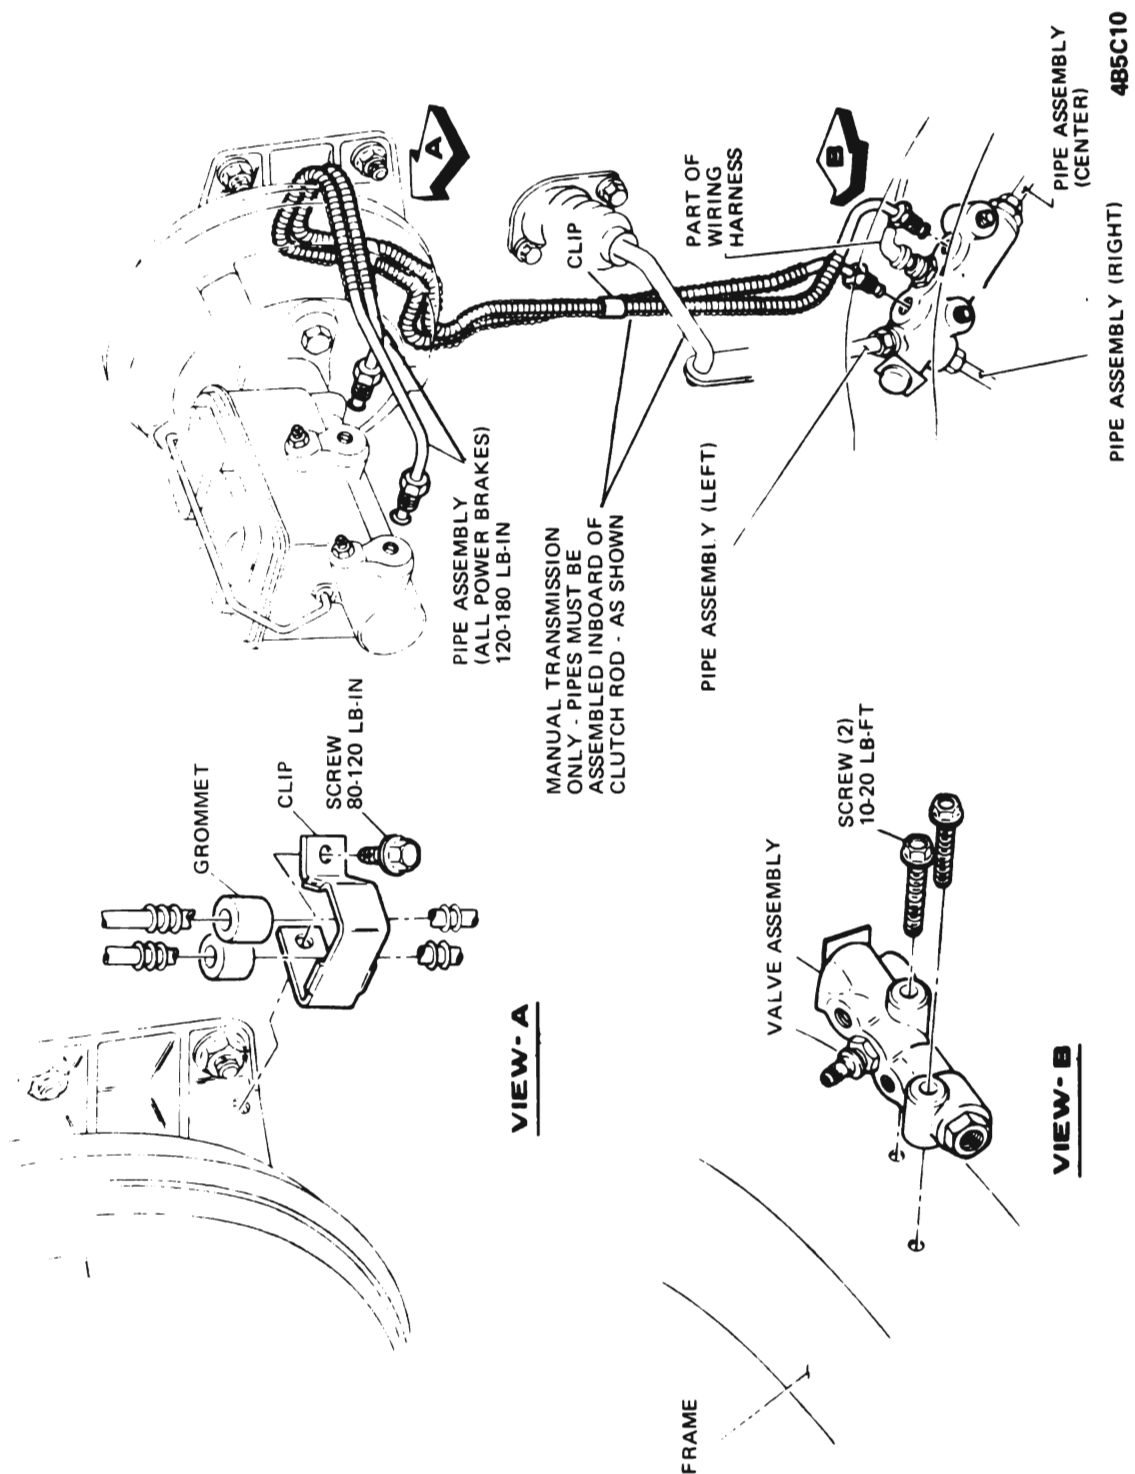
C-10 Brake Lines - Master Cylinder to Combination Valve - A Car
